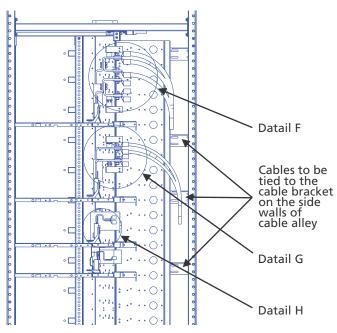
Rear Cable Entry (Side View). Cables branching out though the side walls of cable alley.
